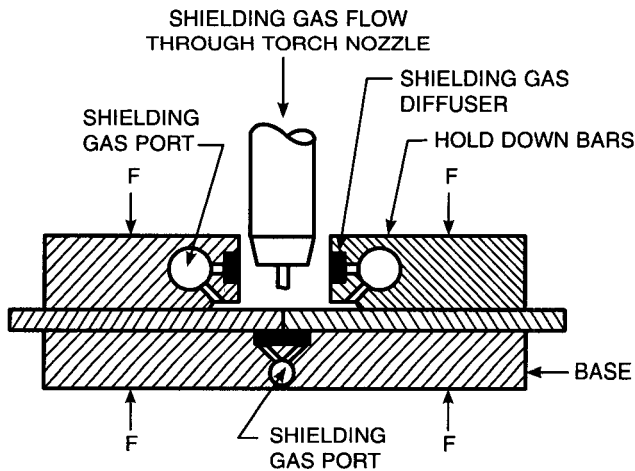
Secondary Inert Gas Shielding Incorporated in the Welding Fixture
